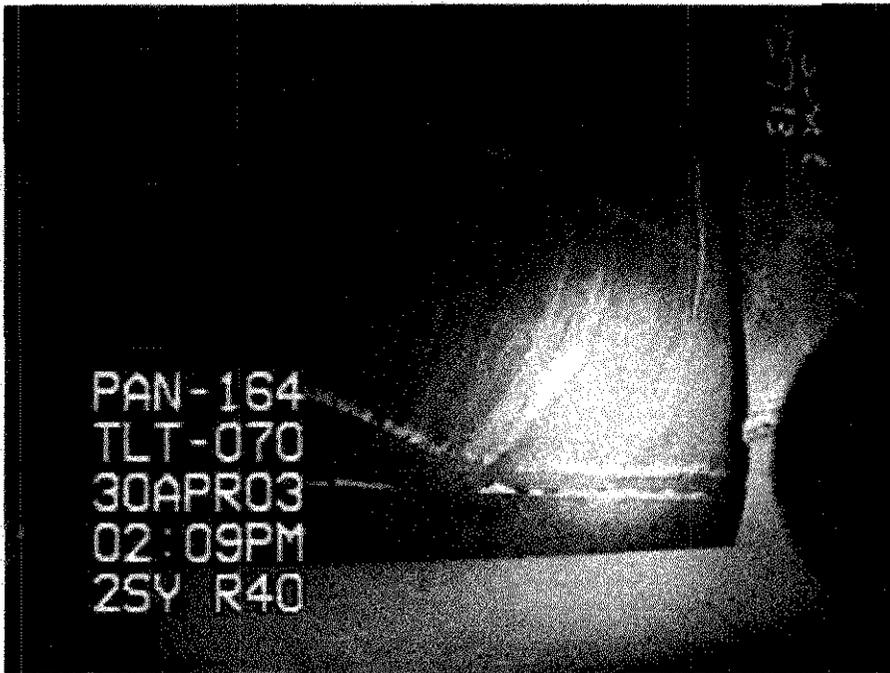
SY-102 Riser 40, Primary Tank, Knuckle Weld (2003)
